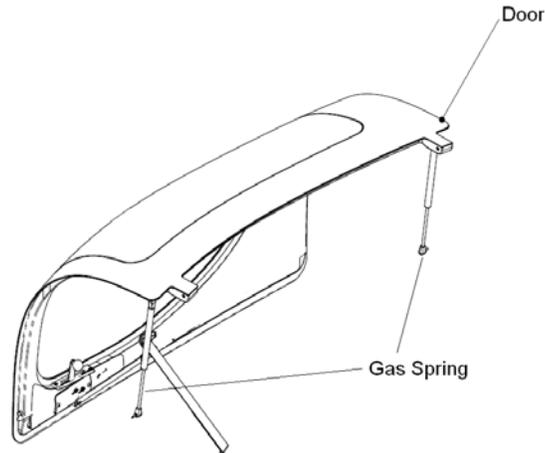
Location of the Gas Spring Cylinder (Typical for Both Doors, Starboard Side Shown)
